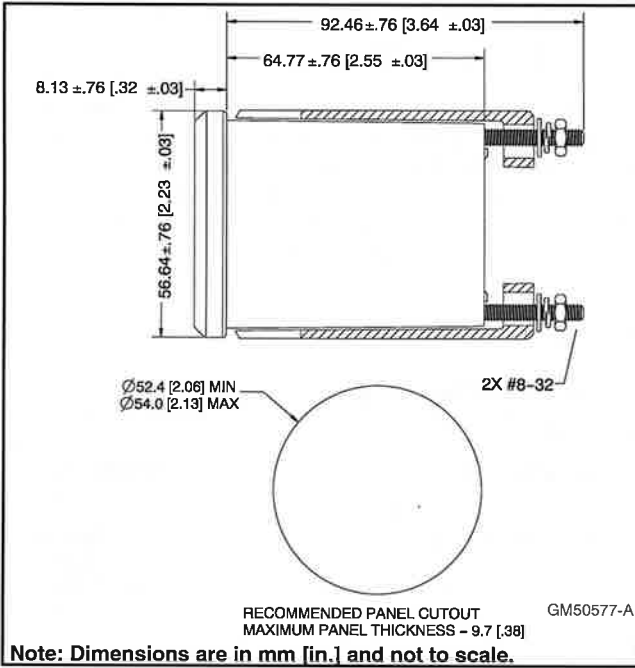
Two Inch Digital Gauge Mounting Dimensions
